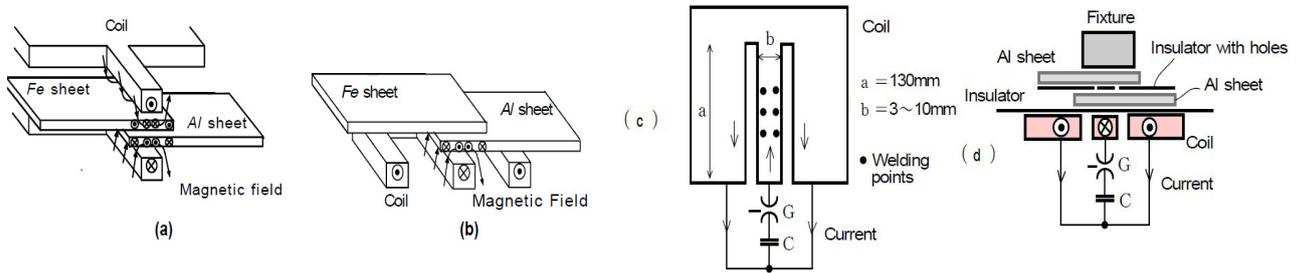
(a) Double layer H shaped single-plane inductor coil [9], (b) Monolayer E shaped flat coil [10], (c) Spot welding with the help of insulating mask, (d) Welding system [11].
